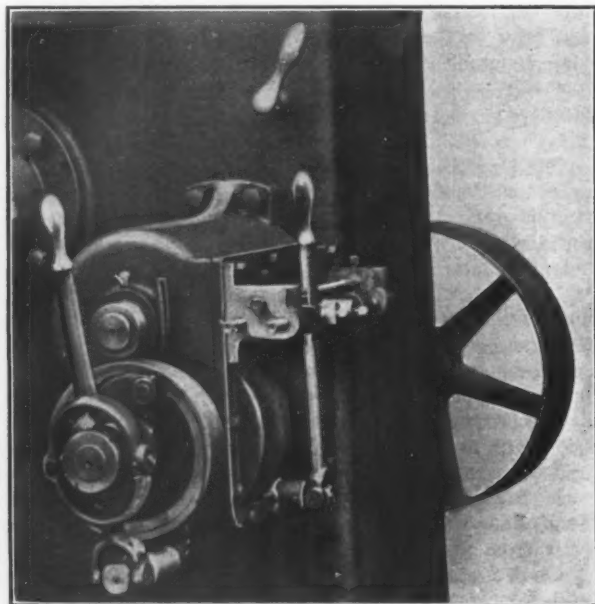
Detail of the New Queen City Shaper Gear Box.
